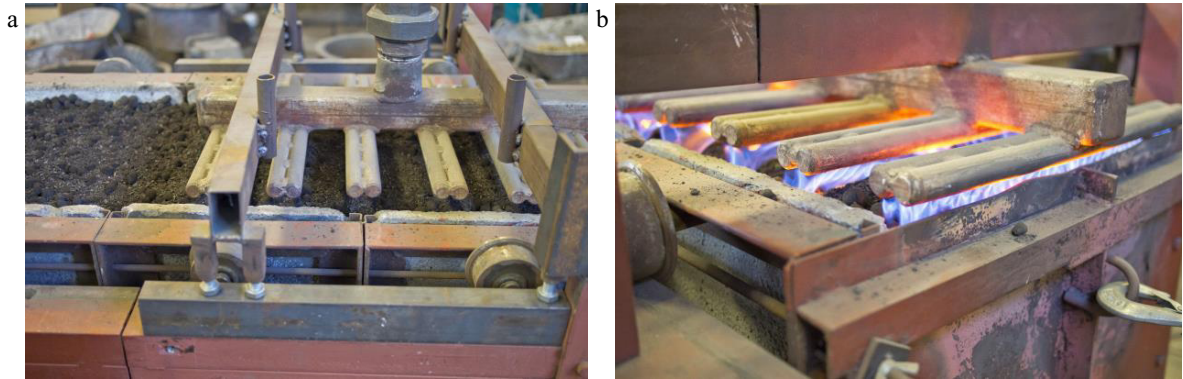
(a) Horizontal furnace with ignition head; (b) Start of batch ignition.
